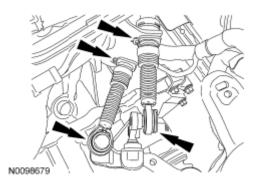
Locating Transaxle Control Cable Courtesy of FORD MOTOR CO.
